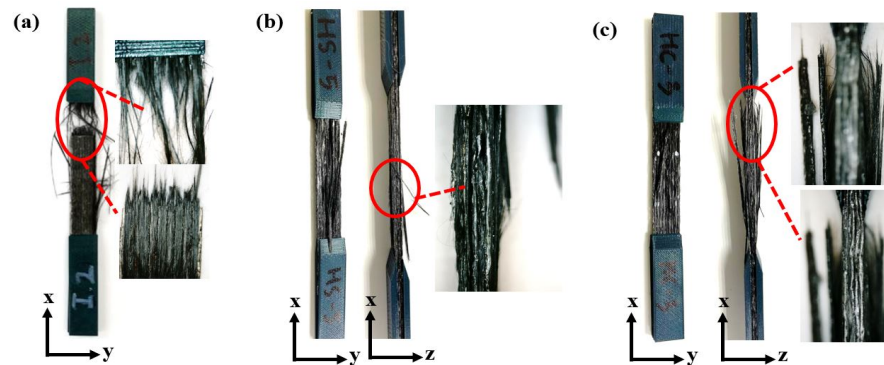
Fractured samples after performing tensile testing. (a) Intact; (b) continuous; (c) cyclic.
